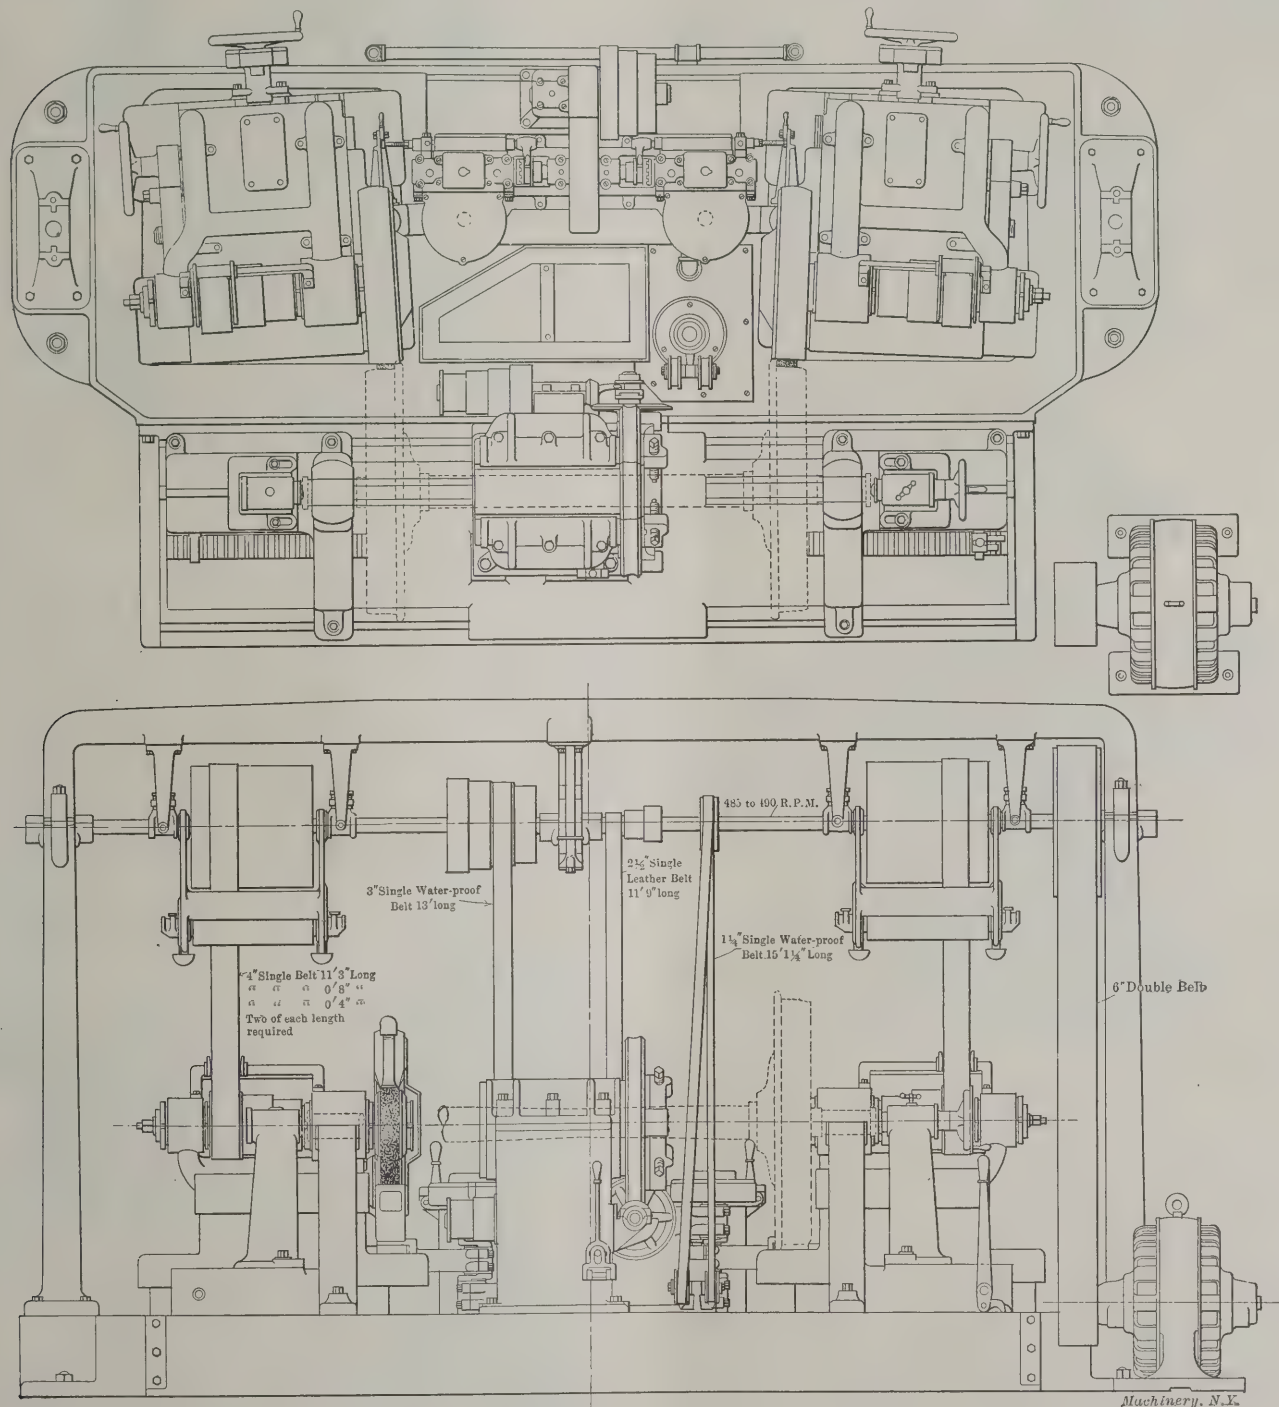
Plan and Elevation of Norton Car Wheel Grinder.
